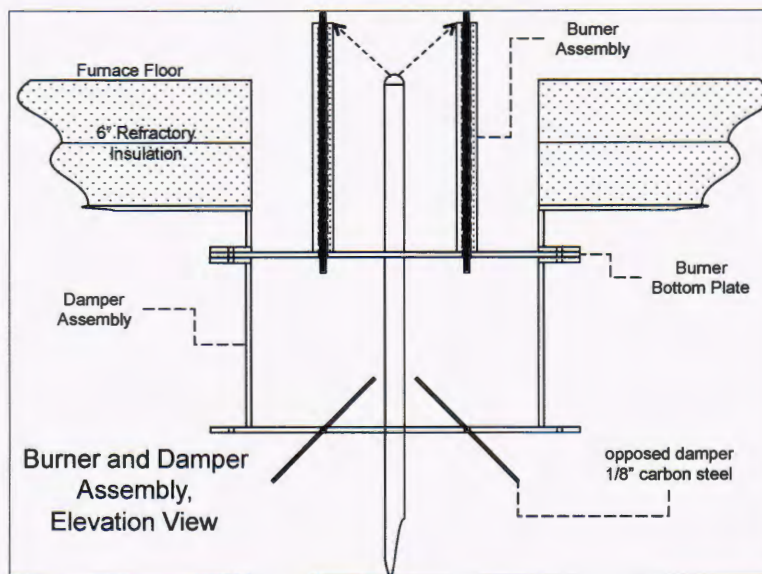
Proposed installation. Here, the burner is shown installed with an inlet damper for excess air control into the bottom of a furnace.
